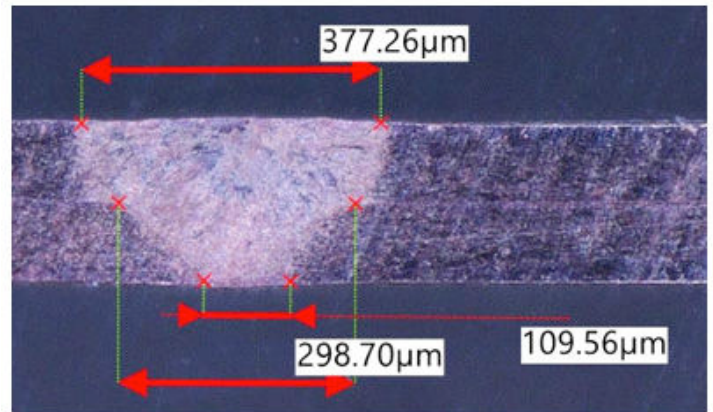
Cross section of a full penetration weld joining two 100 µm thick phosphor bronze plates. The weld is free of porosity and voids
